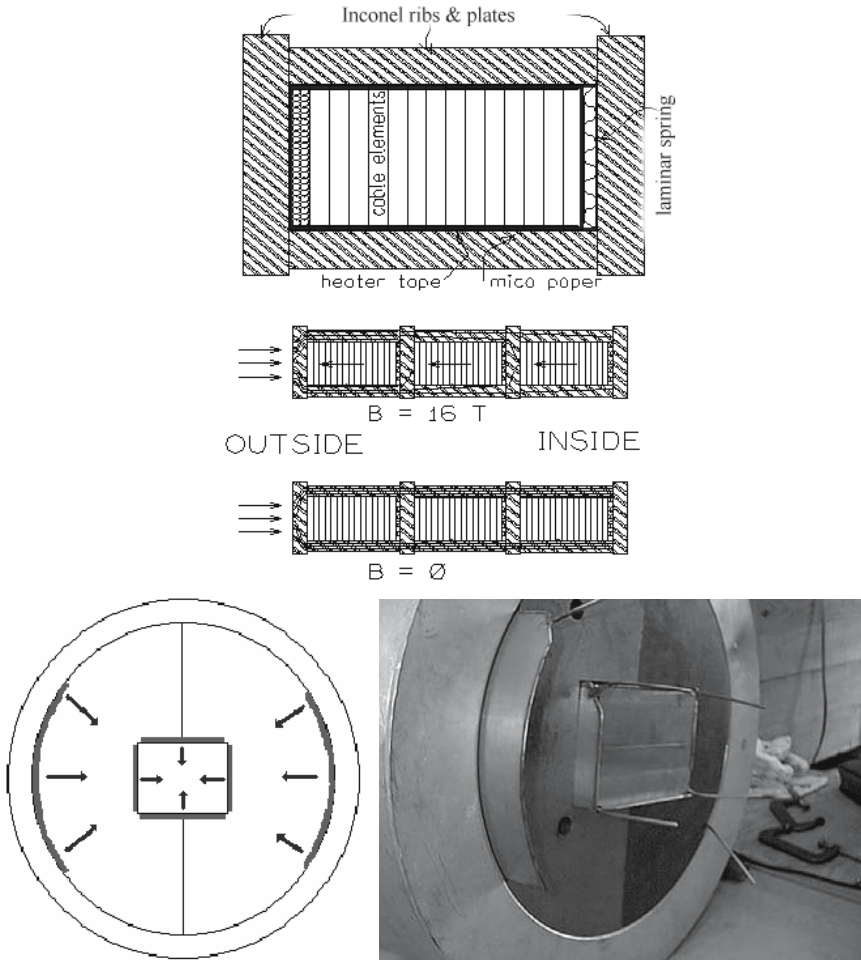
Stress management in a block-coil dipole: (a) support matrix and laminar springs in coil region; (b) hydraulic bladders deliver uniform preload within coil assembly; (c) bladders assembled in flux return.
